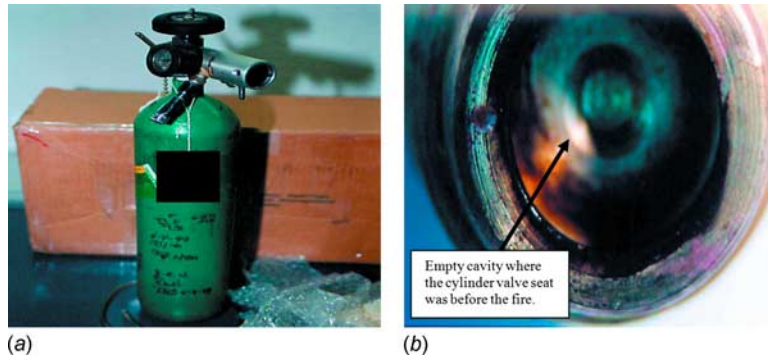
(a) Oxygen regulator assembly; (b) the cylinder valve seat retainer showing consumption of the cylinder valve seat.
